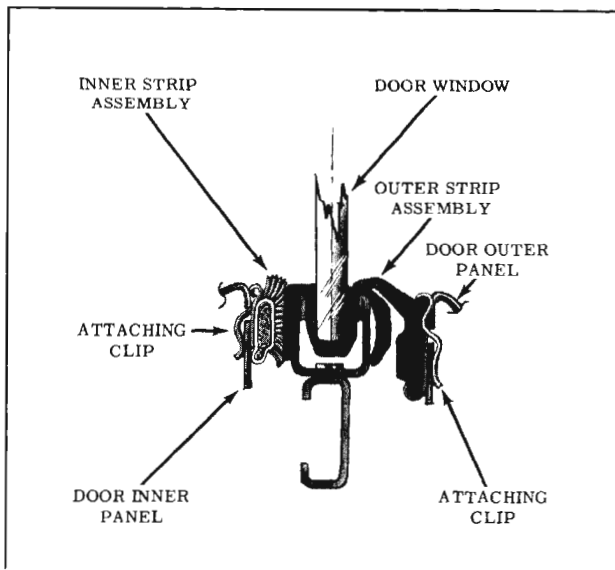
Door Glass Inner and Outer Strip Assemblies
